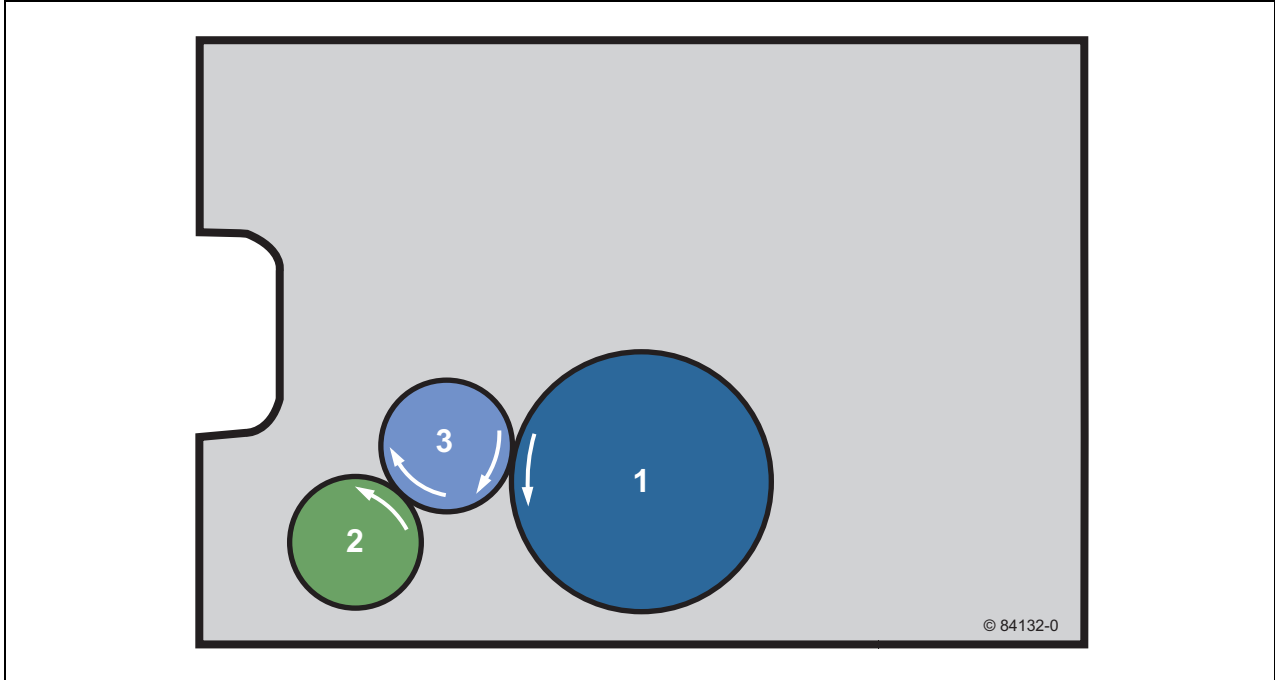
Wheel drive of the mass compensation shaft on the drive side
